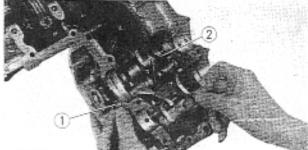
① Shift fork guide shaft ③ Gear shift drum
